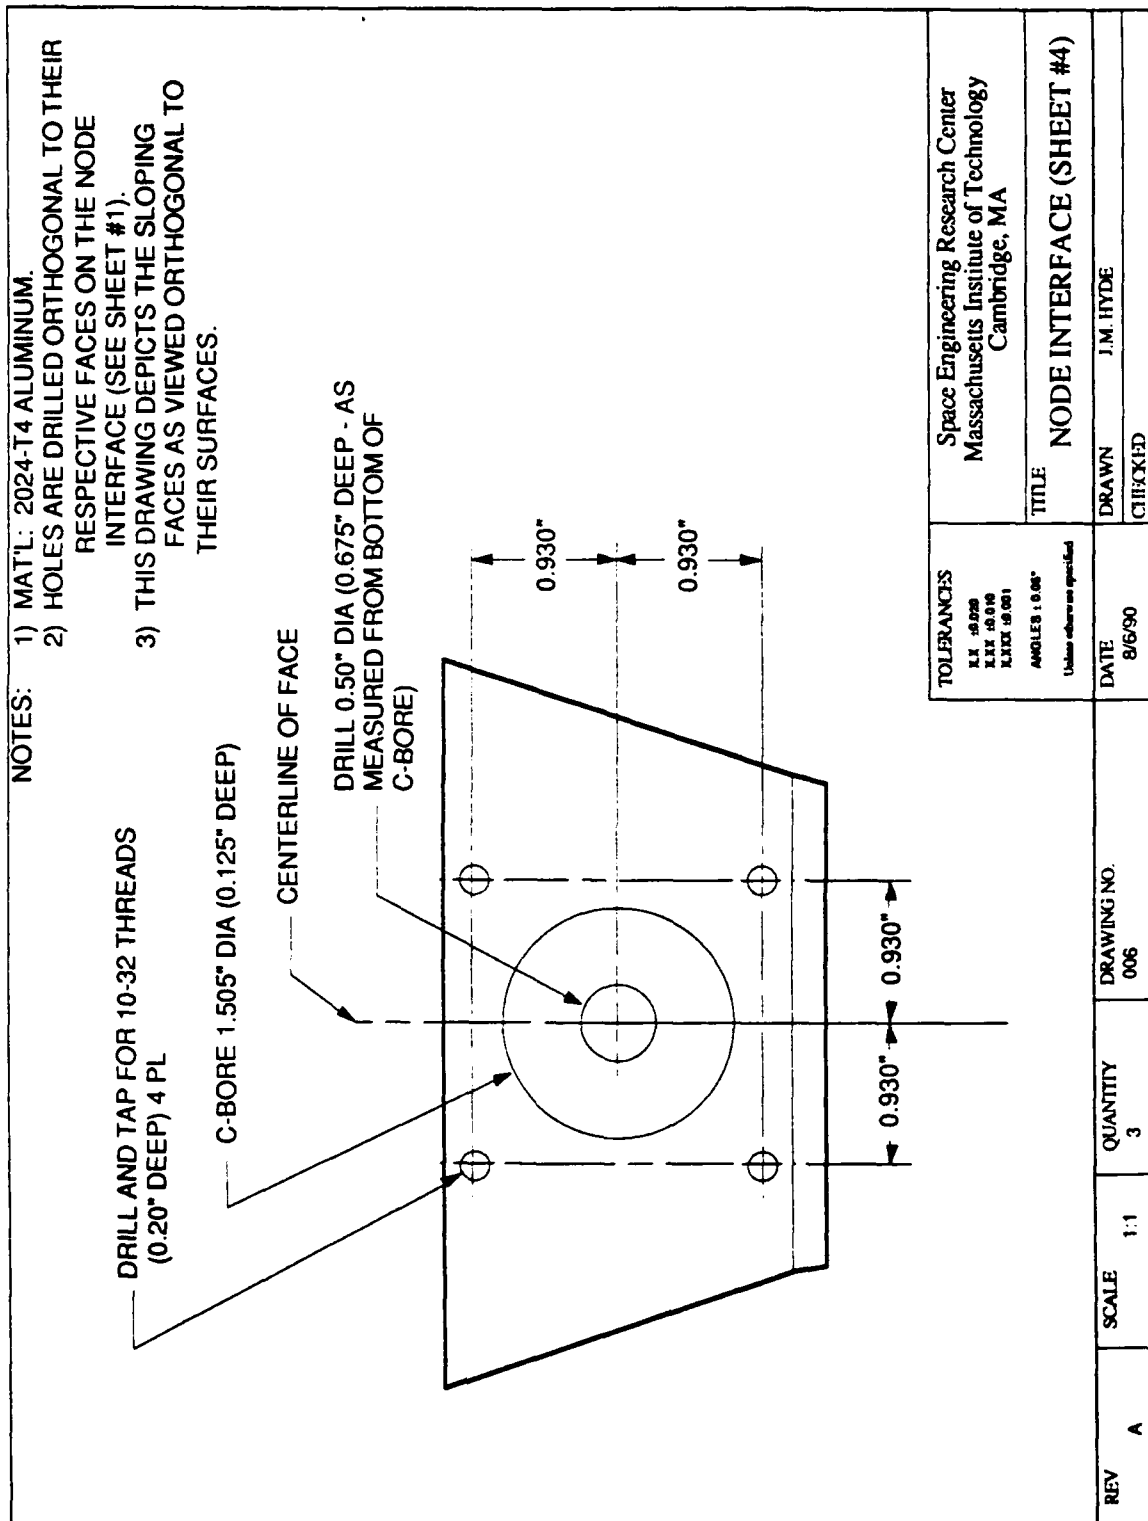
Node/motor interface engineering drawing, sheet #4.
